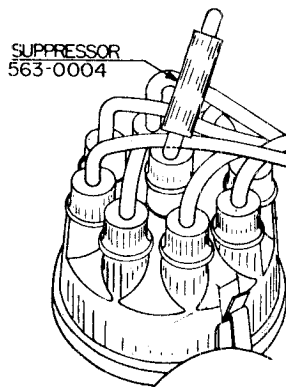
DISTRIBUTOR SUPPRESSOR 563-0004
